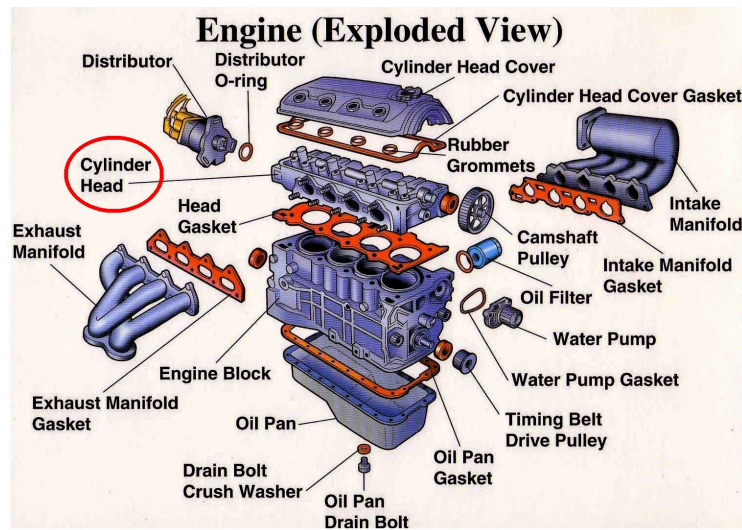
Exploded view of an internal combustion engine showing the position of the cylinder head [4].
